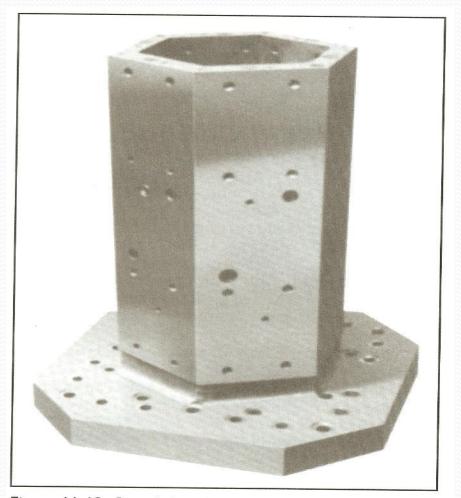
Six-sided tooling blocks. (Courtesy Mid-State, Machine Products)
